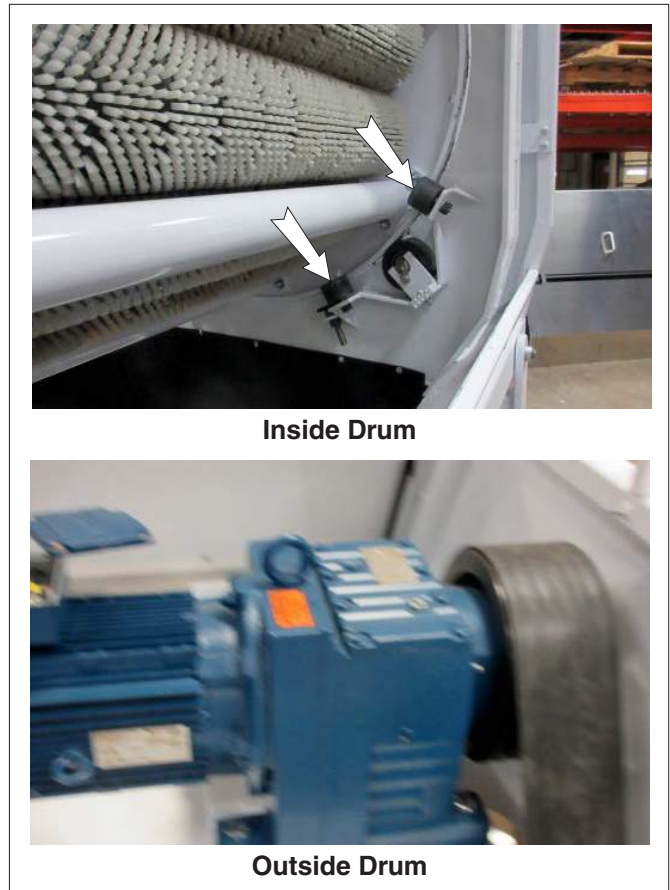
CENTERING DRUM WHEELS (TYPICAL)
